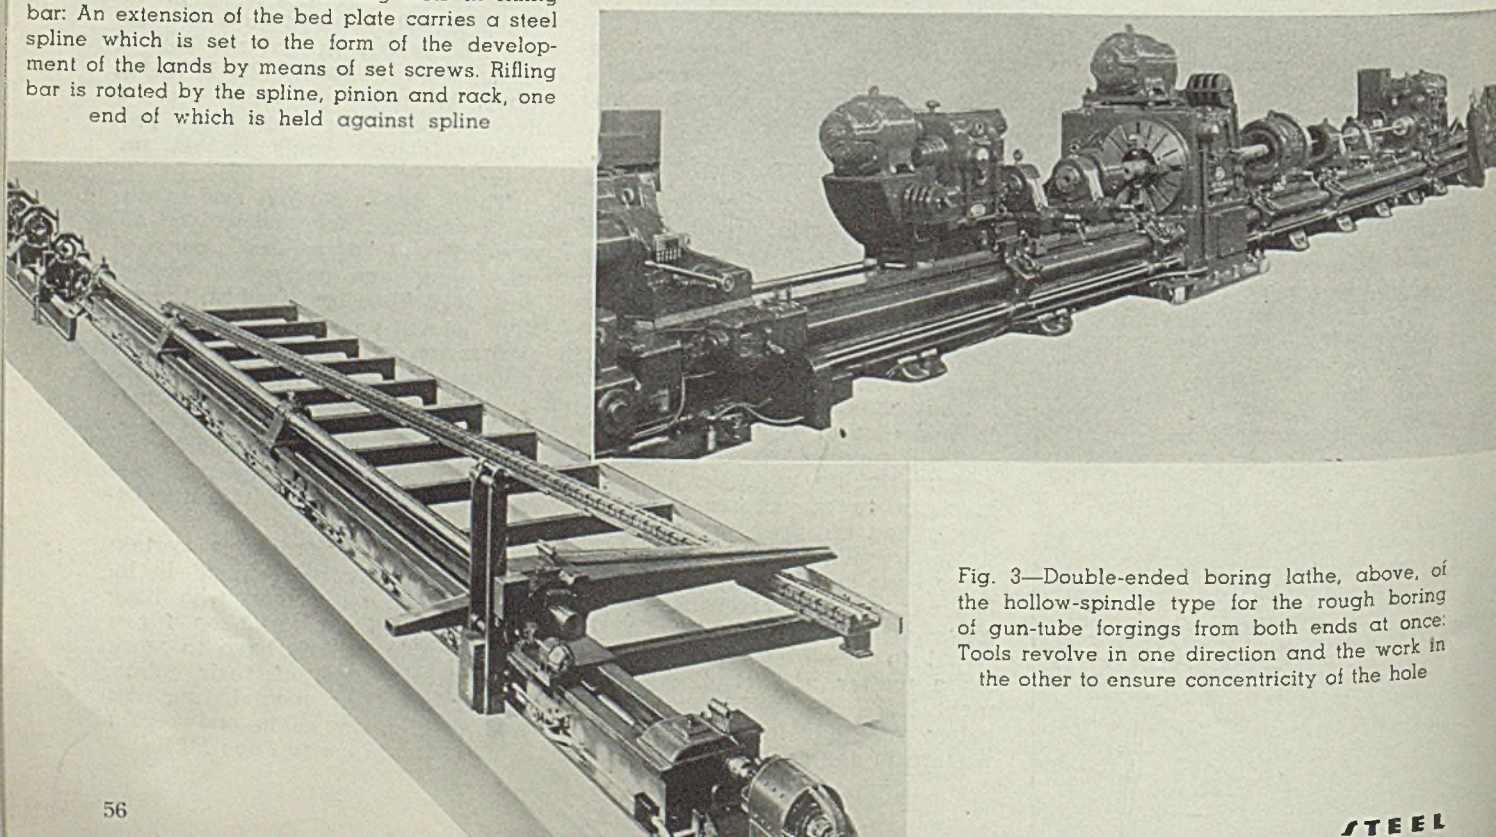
Double-ended boring lathe, above, of the hollow-spindle type for the rough boring of gun-tube forgings from both ends at once: Tools revolve in one direction and the work in the other to ensure concentricity of the hole
